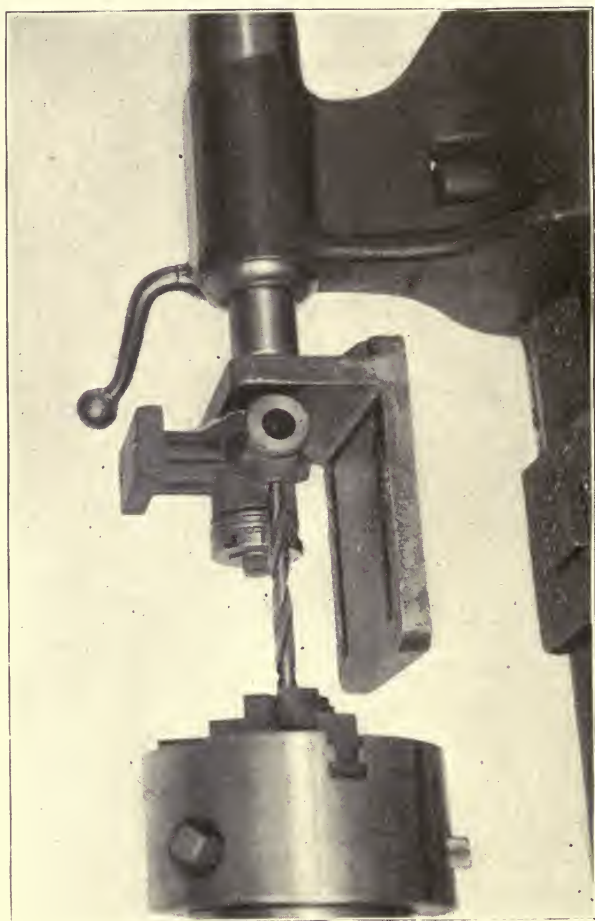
DRILLING MAIN BEARING FOR GEAR STUD.
